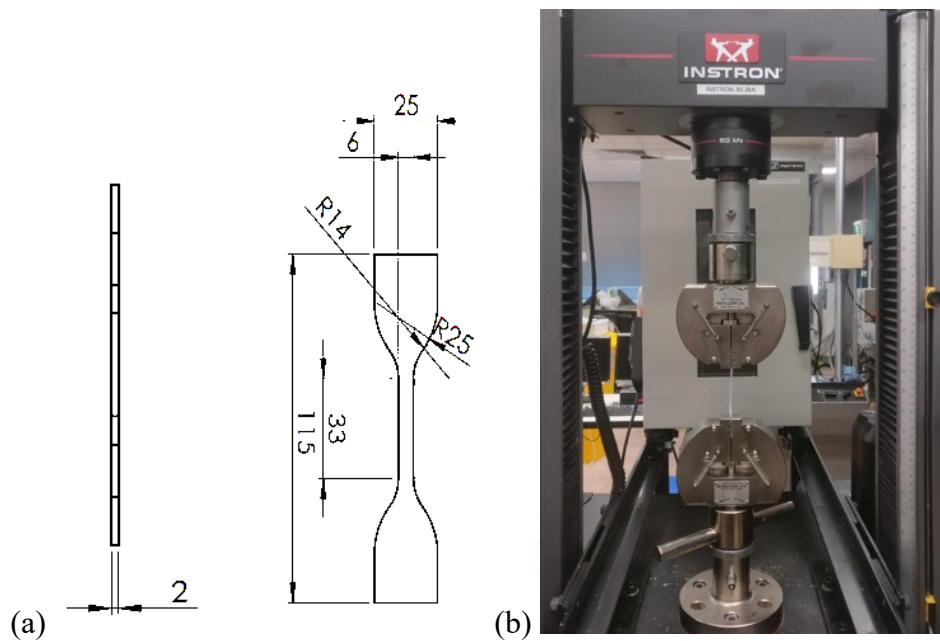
(a) Tensile test piece for ASTM D412 (b) tensile test equipment
